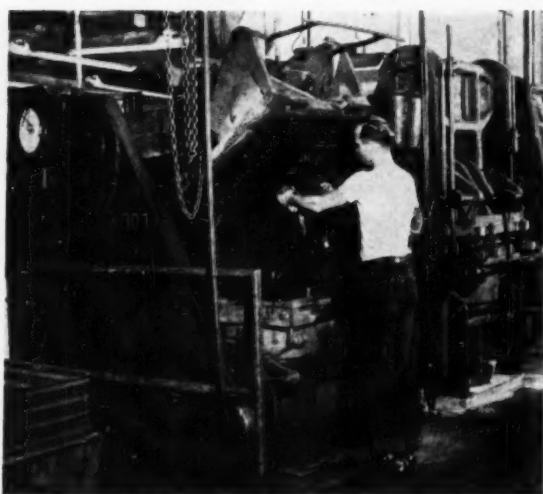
AUTOMATIC MECHANICAL-TYPE PRESSES
